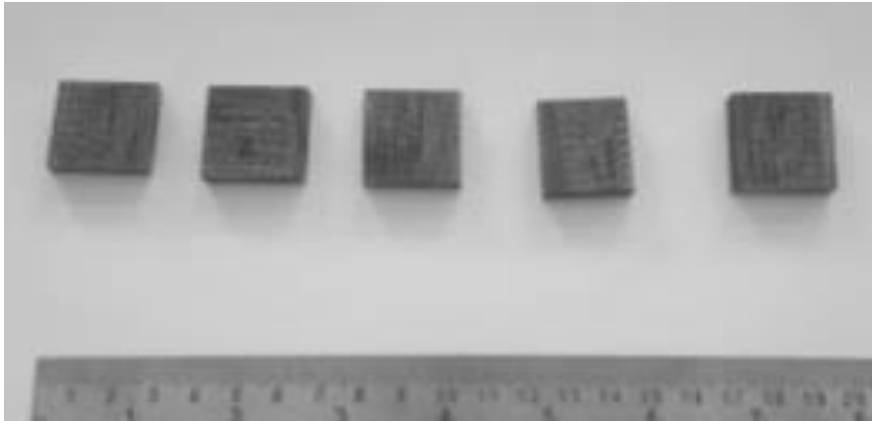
AISI 1020 mild steel workpieces prepared for coating
